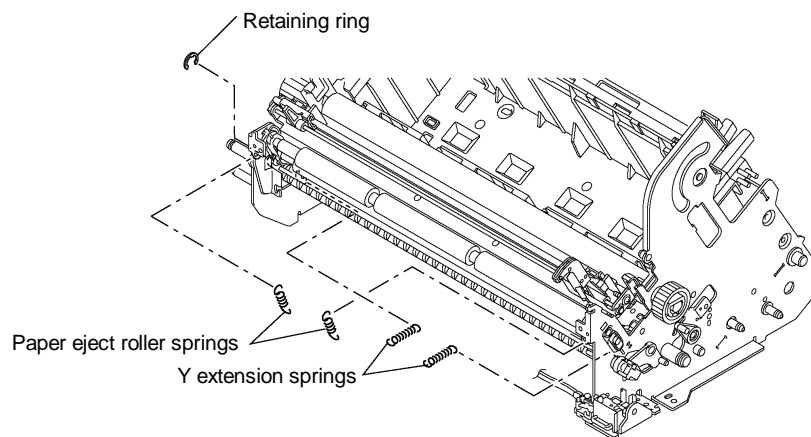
Removing the YC Lift Shaft and LF Change Shaft 1
